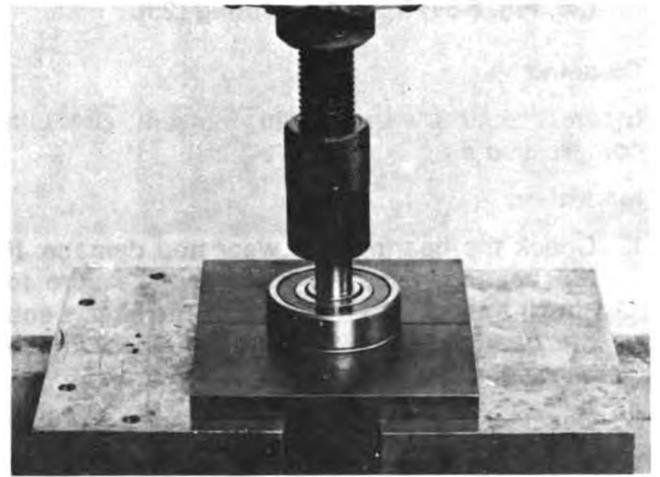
(N10879). Remove The Shaft From The Bearing.
